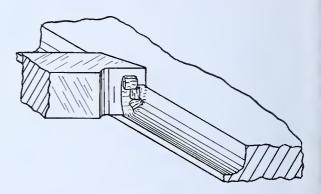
Planing a Half-U Groove for a U Weld
